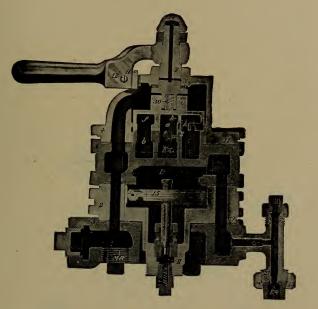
H-6 Automatic Brake Valve, Sectional View, No. 1.
